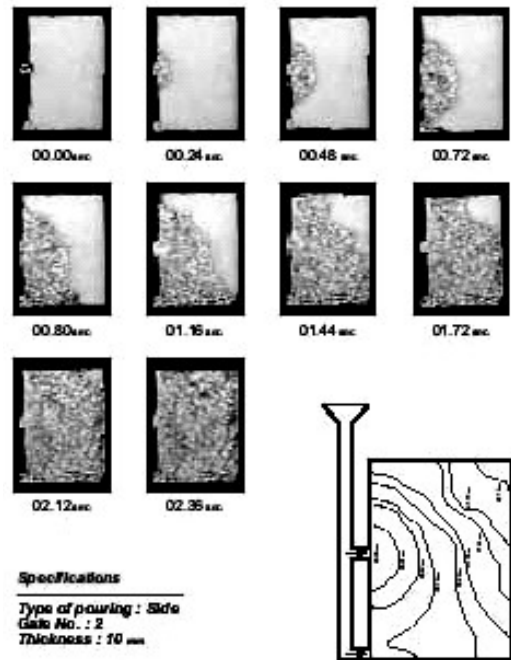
Mold filling behavior in the side gating system with 10 mm thickness.
